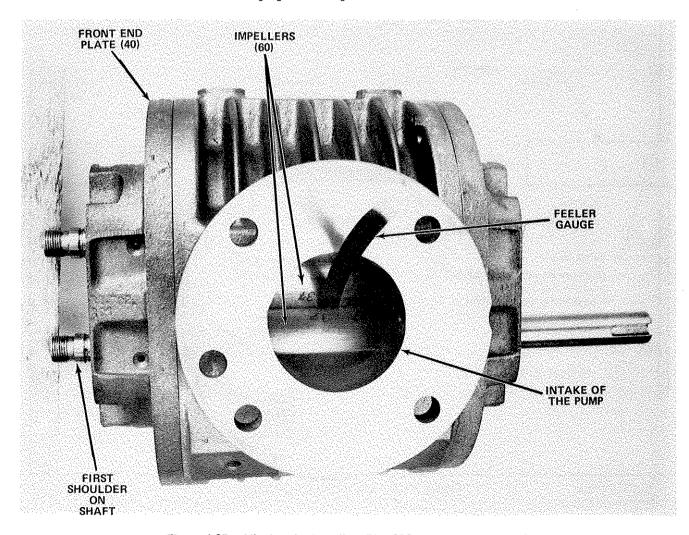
Aligning the Impellers (WA-250 pump model shown).
